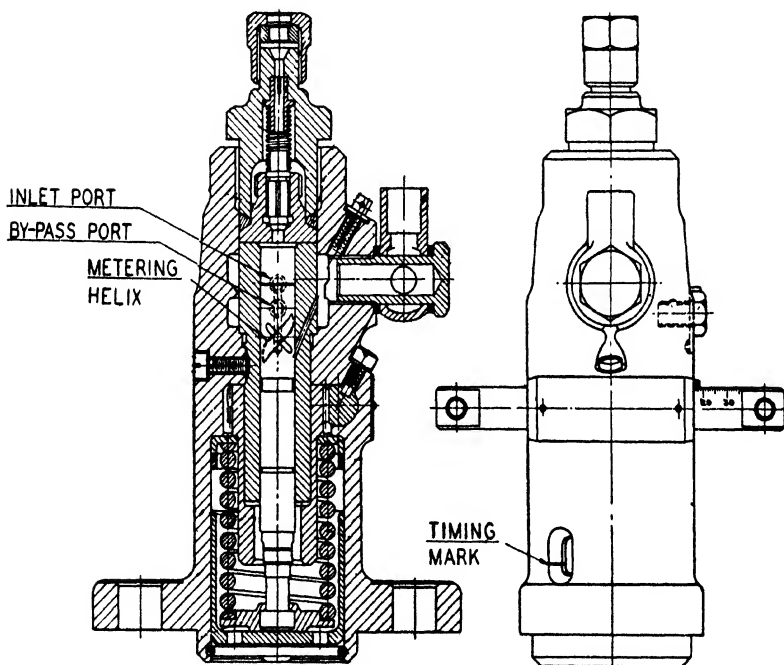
SECTION AND SIDE VIEW OF SCINTILLA SINGLE-UNIT PUMP.
